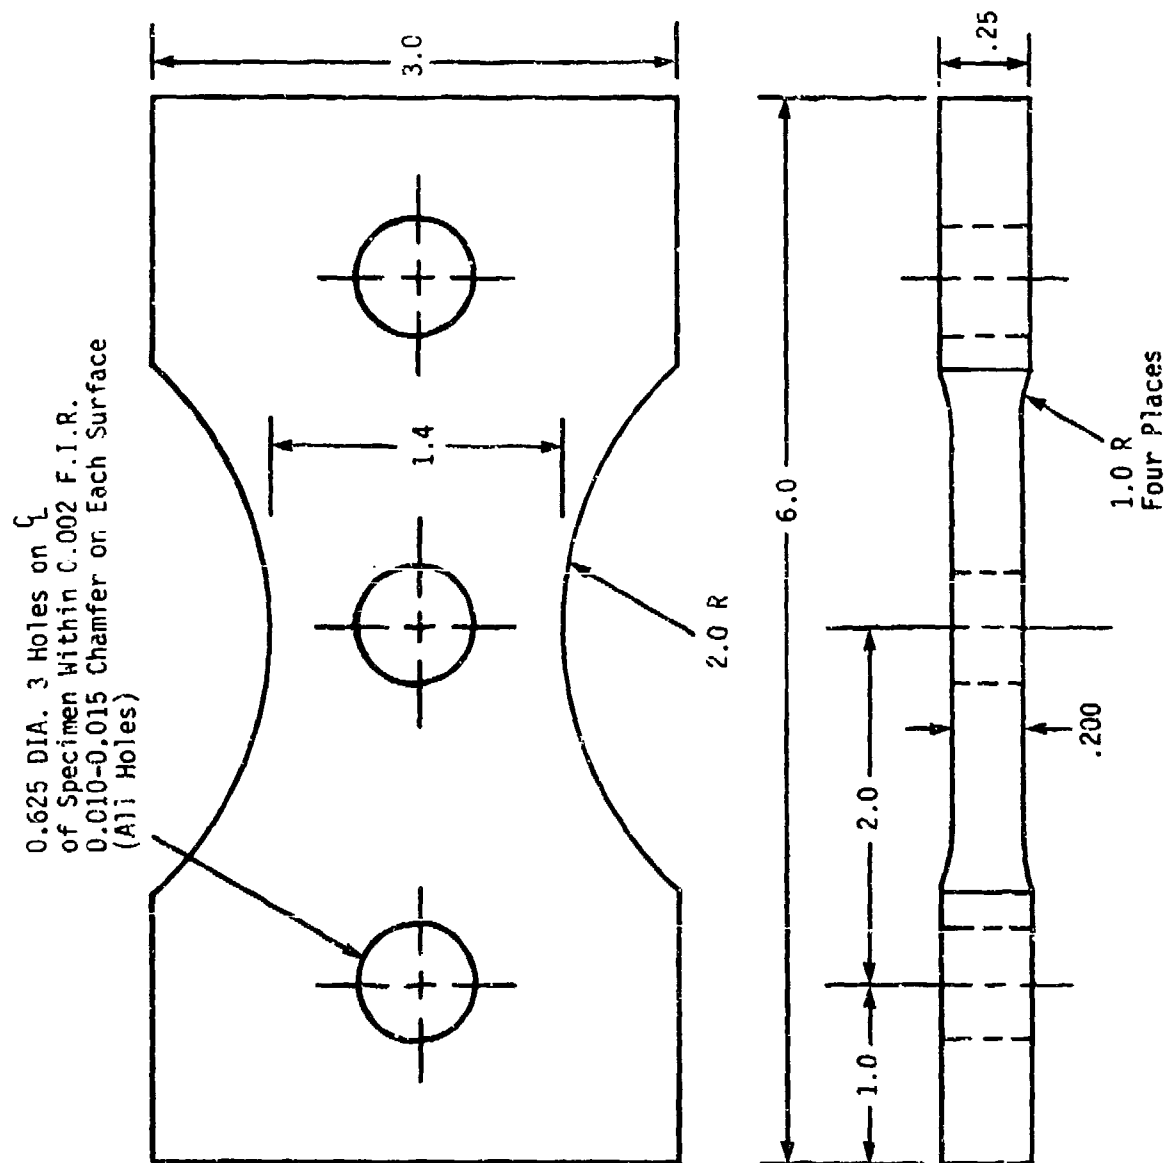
Geometry of the Bolt Hole Fatigue Specimen
